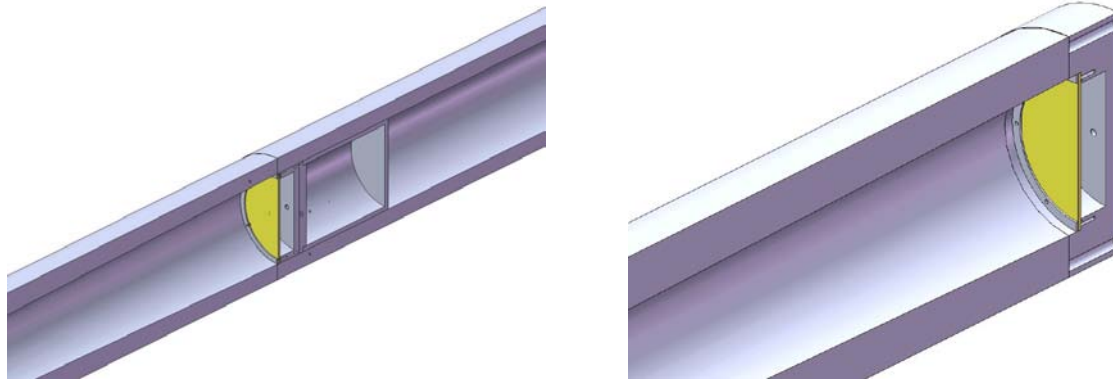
(a) Slider Mounting Configuration, (b) Fixed Base Mounting Configuration
